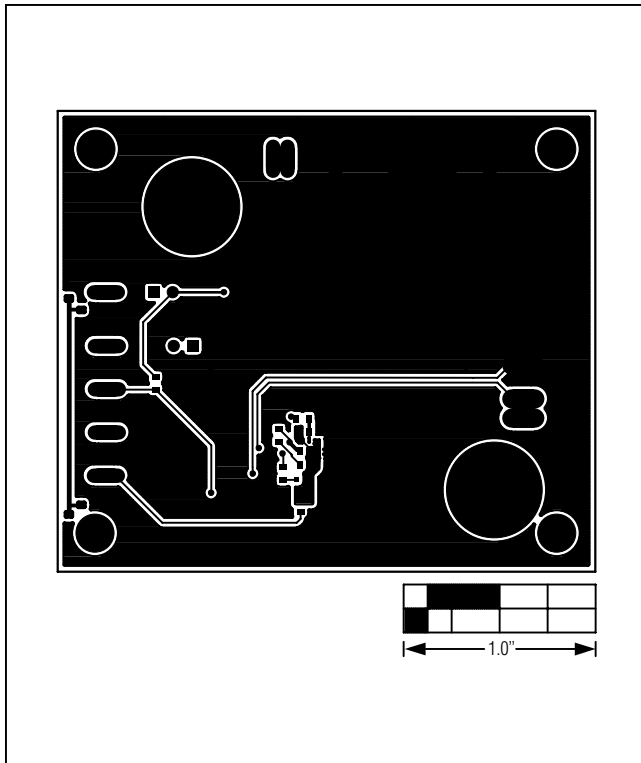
MAX15112 EV Kit PCB Layout—Solder Side
